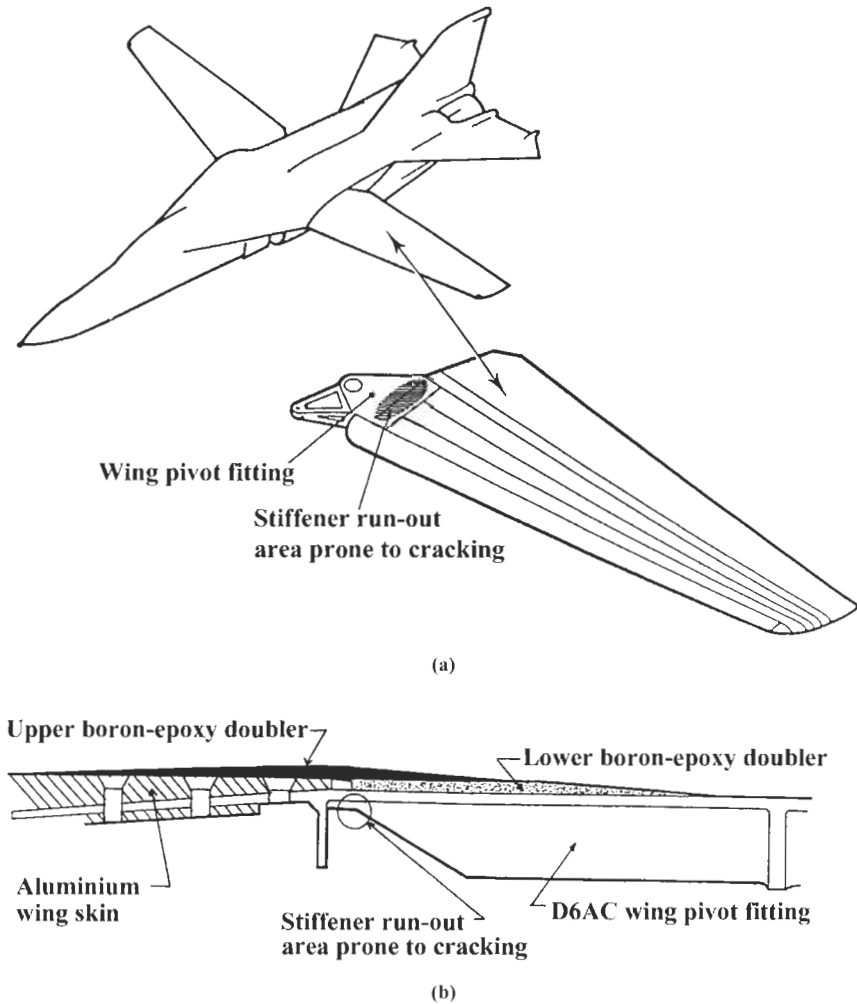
(a) F-111C aircraft wing pivot fitting (WPF); (b) cross-section of the WPF and wing skin showing boron-epoxy doublers deployed over the region prone to cracking. [36]
